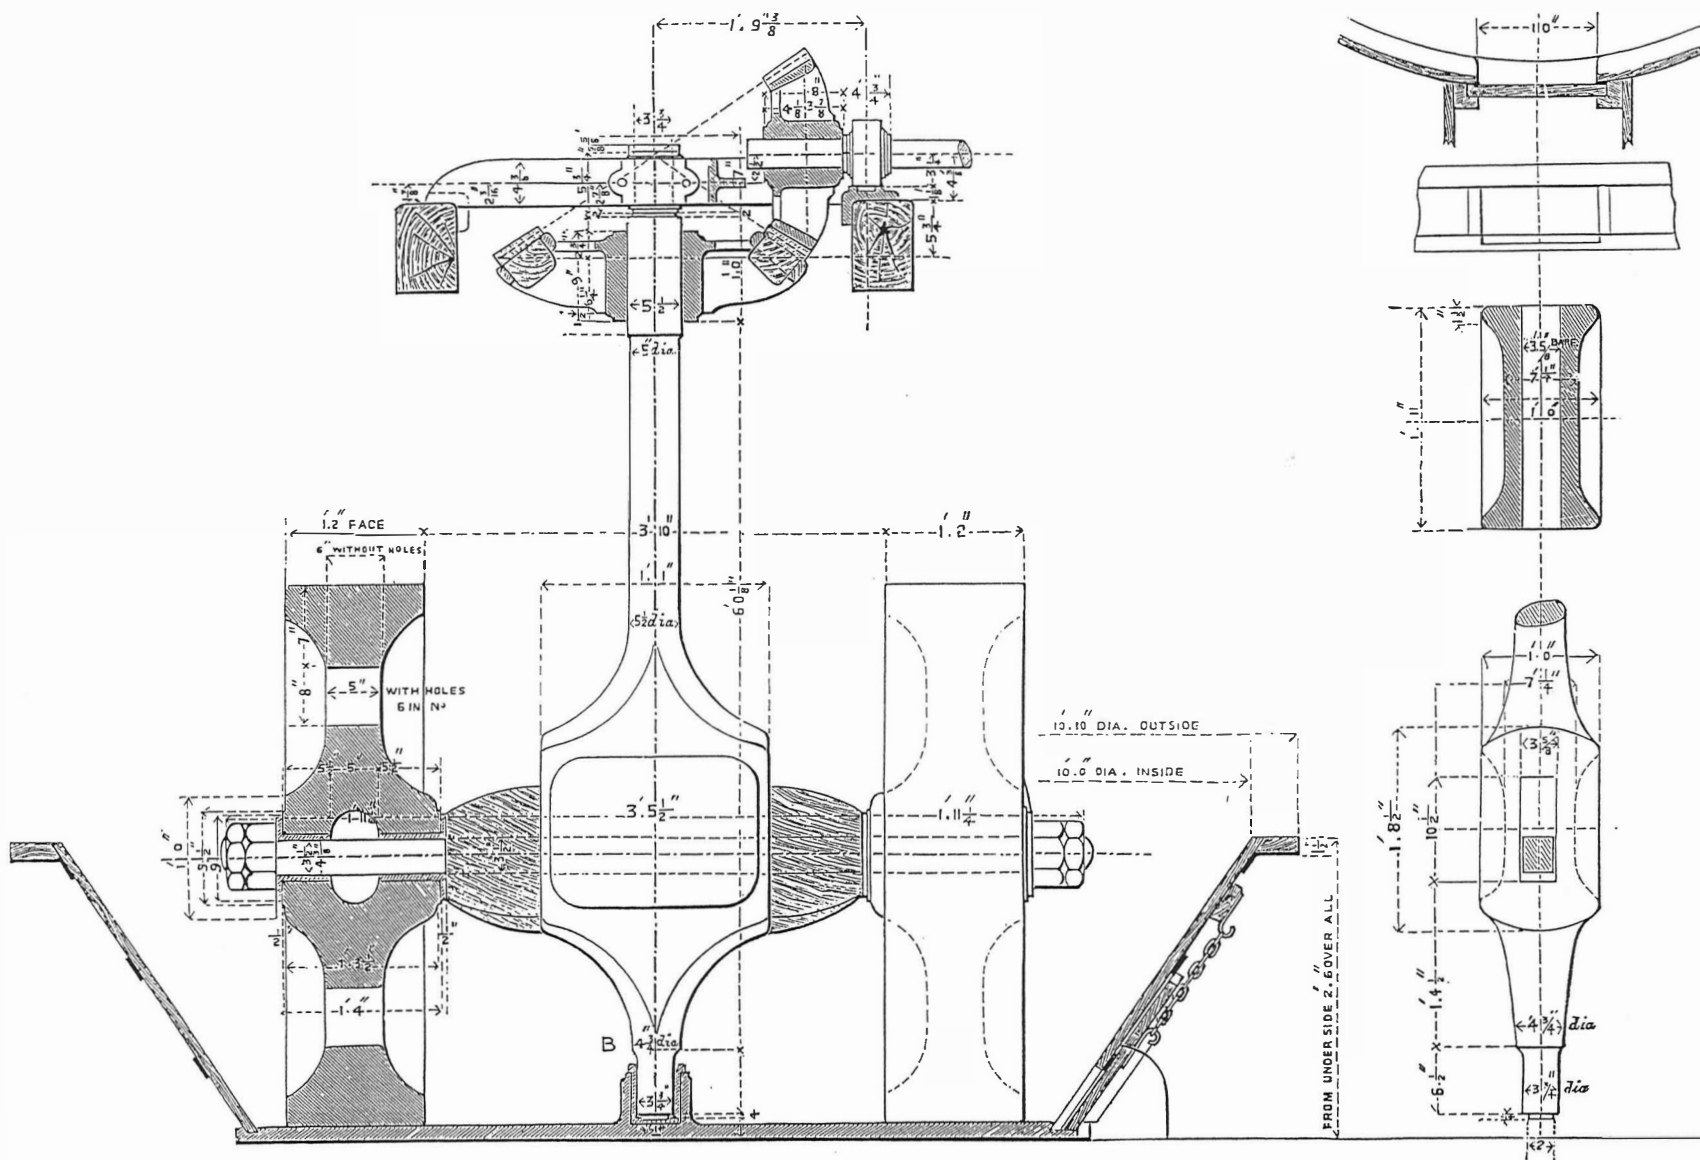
Sectional views of the pulverising and incorporating mills manufactured by J & H Gwynne for the Japanese and Italian Governments.
